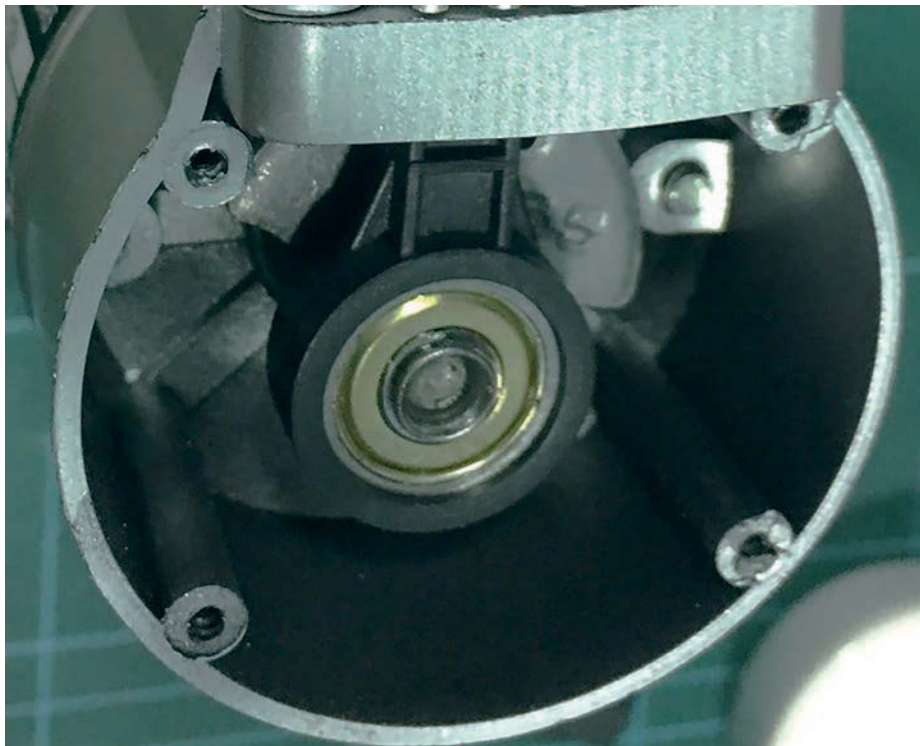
Removing the endplate revealed that the piston and conrod are in one piece!
